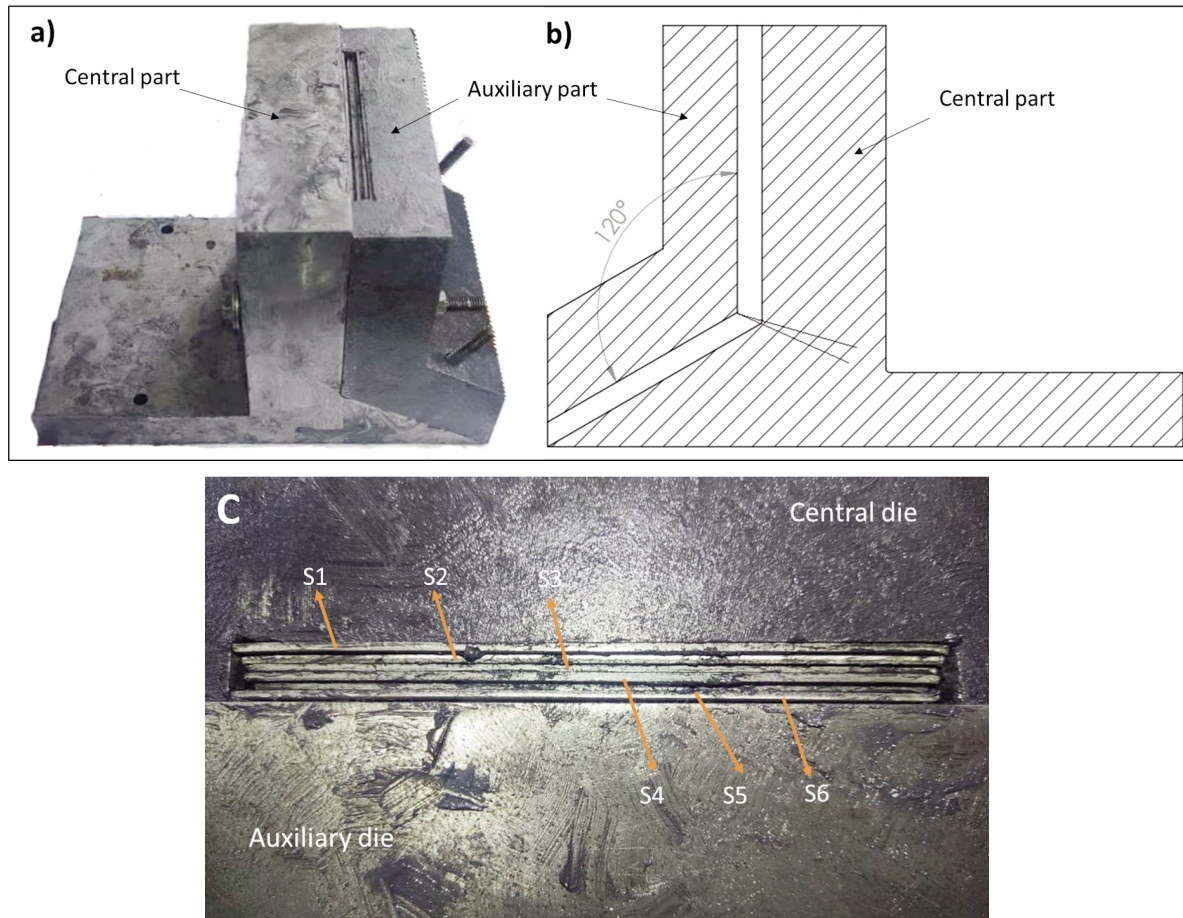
a) ECAP die; b) ECAP die cross-section; c) Positioning of sheets inside channel
